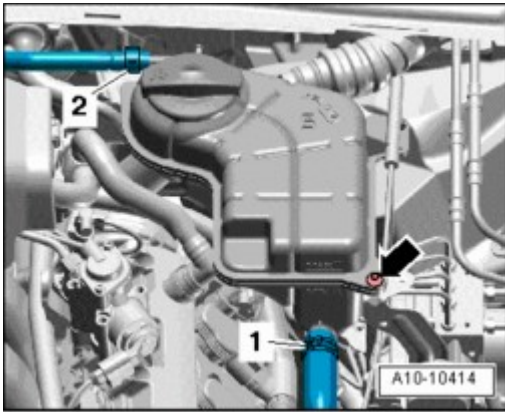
Removing Coolant Hoses & Coolant Expansion Tank
